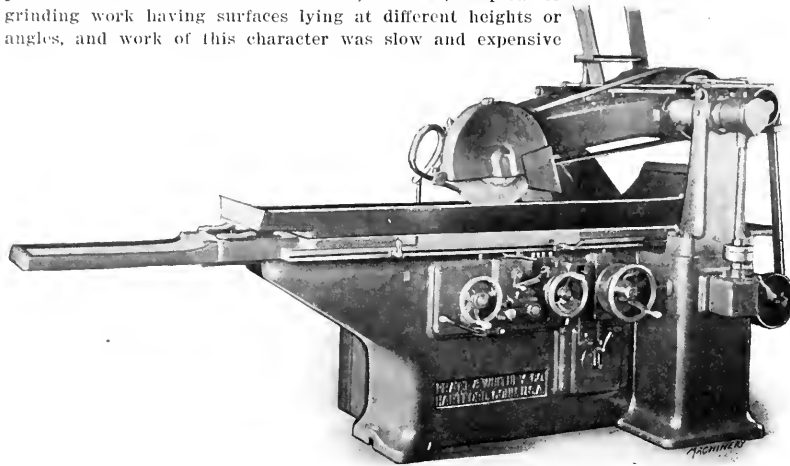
Front View of Pratt & Whitney Horizontal Surface Grinder
